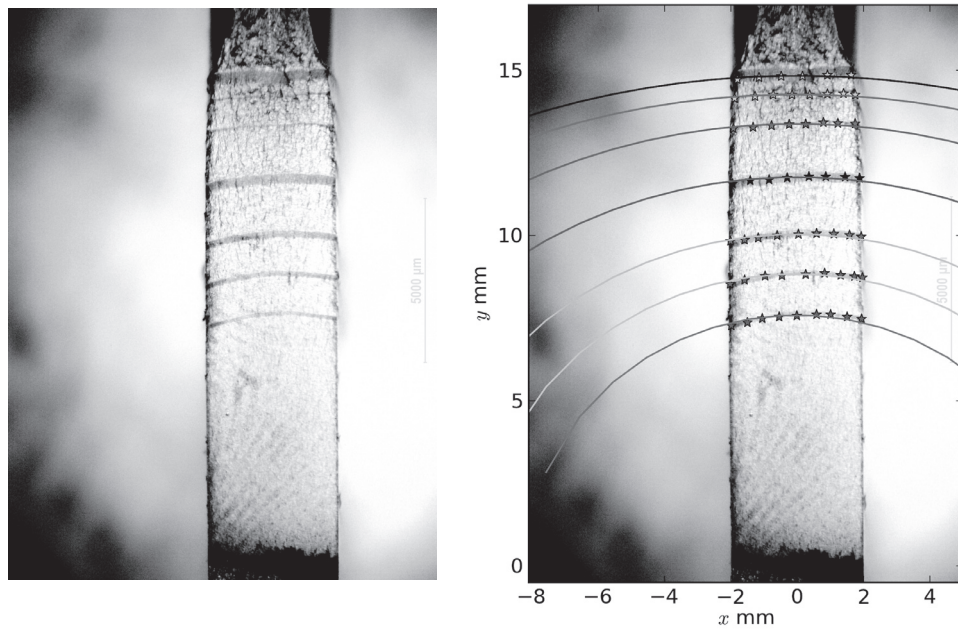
The fatigue crack surface of specimen $B=4.0$ mm, $F_{\max}=3.2$ kN.
